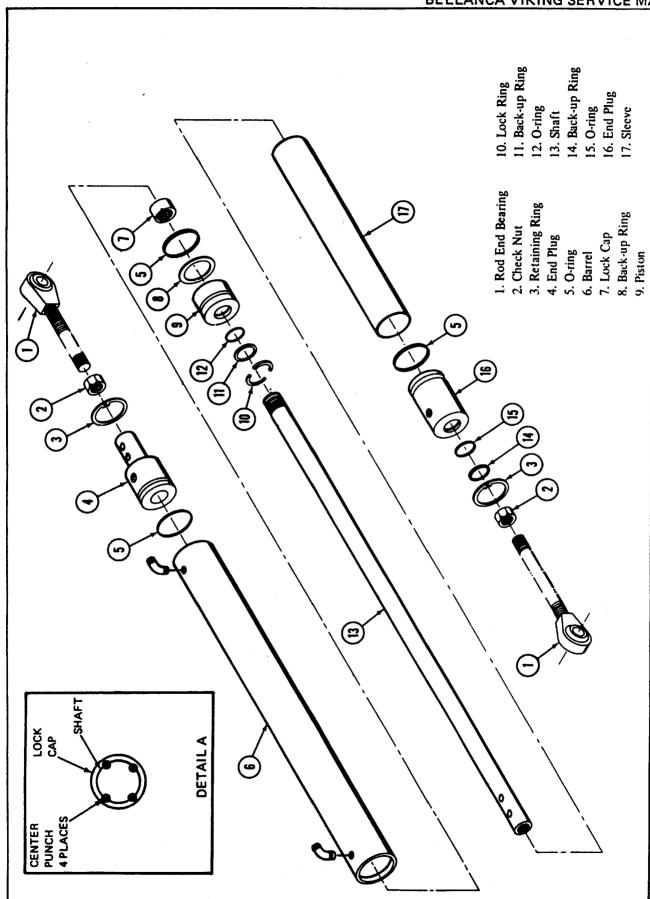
, Nose Gear Actuating Cylinder. Aircraft Serial Numbers 79.30906 and above.
